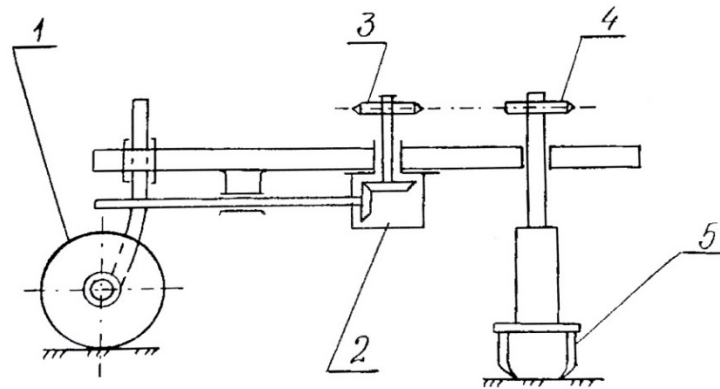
Kinematic Scheme of Driving the Milling Cutter Functioning Body of the Combined Sowing Machine
